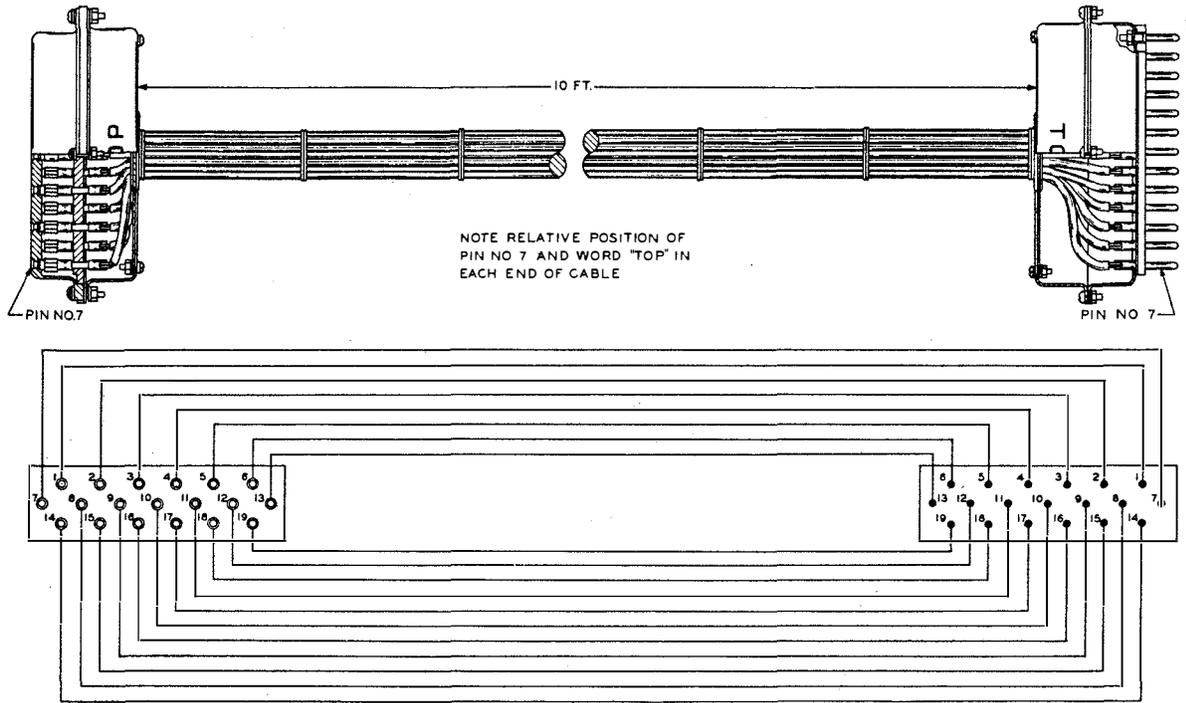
Unit Test Cable Assembly (Dwg. No. 1198C)
